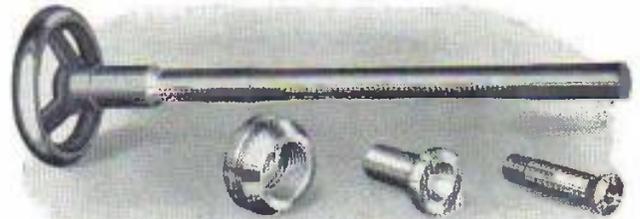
Hand Wheel Draw-in Collet Chuck Attachment.
